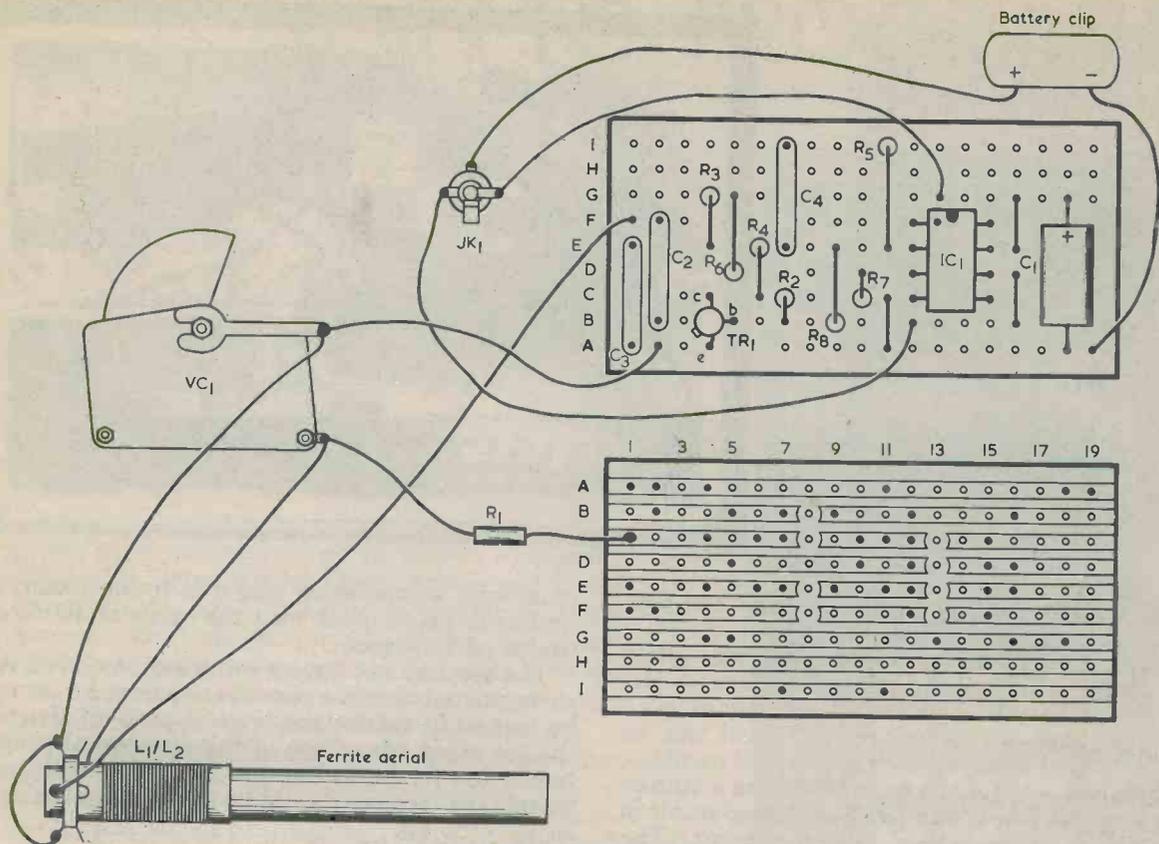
Component layout on the Veroboard panel and the general wiring of the receiver
